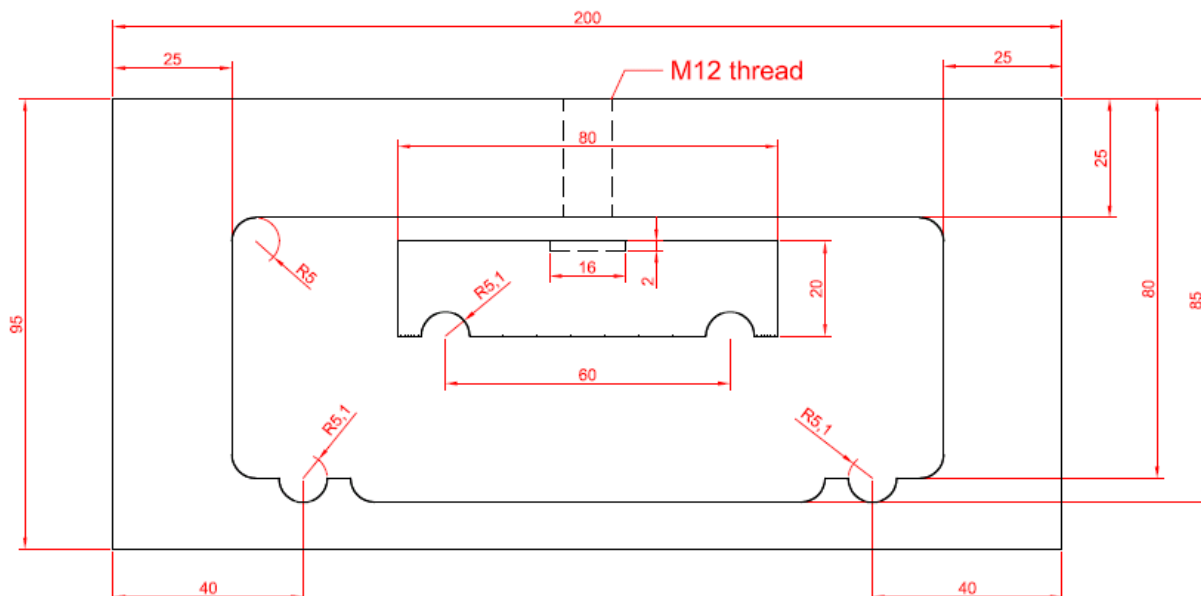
New four-point bend SSC loading jig. The jig is made from 25%Cr duplex stainless steel with four fixed points for holding alumina rollers
